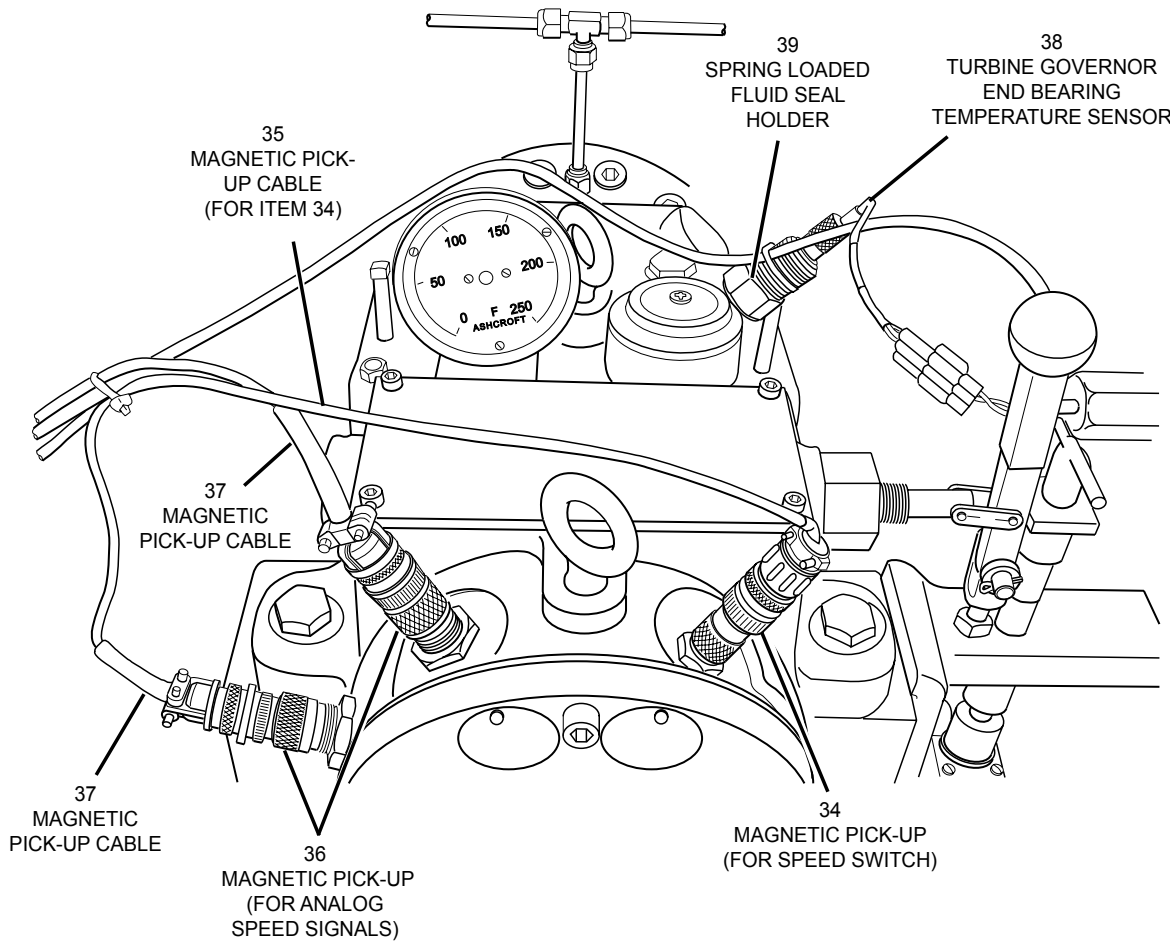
KG TURBINE GOVERNOR END BEARING
